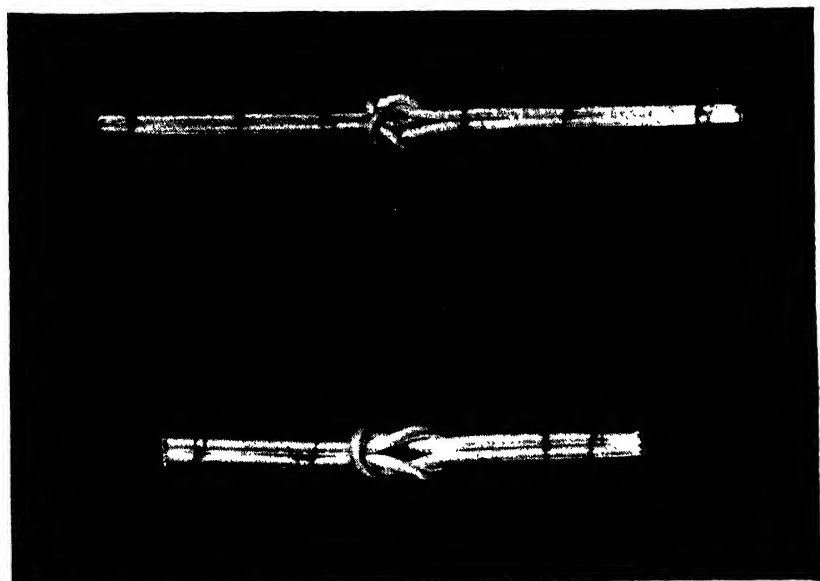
Two "knot" rings tied with binding wire in preparation for hard-soldering.
